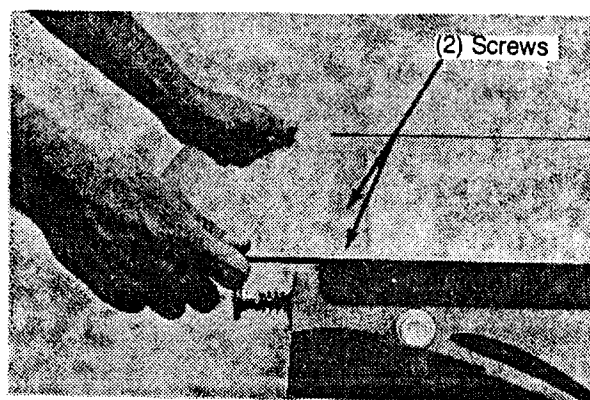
Sliding out the glass. Remove the two screws shown, then carefully slide out the glass.
